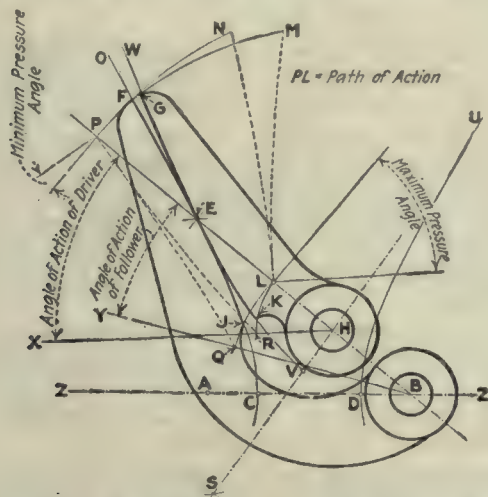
HYPERBOLIC CAM SURFACES FOR SWINGING ARMS ON CLOSE CENTERS WITH PURE ROLLING ACTION
